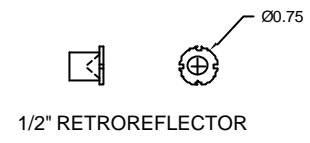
OUTLINE & MOUNTING DIMENSIONS OF RETROREFLECTOR
